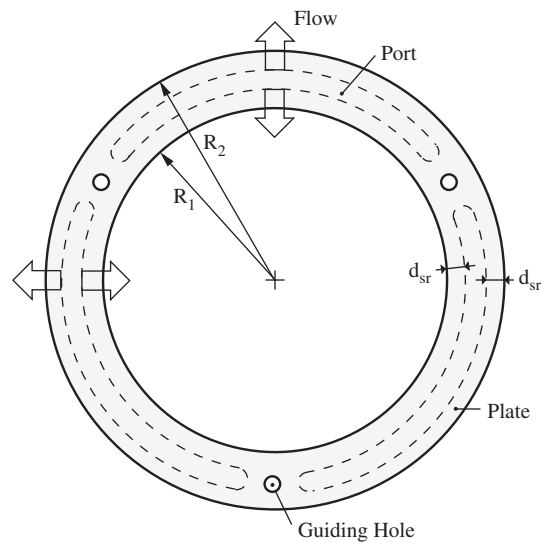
Sketch of model valve ring plate (R_1 is the inner radius, R_2 is the outer radius, d_{sr} is the sealing rim length).
